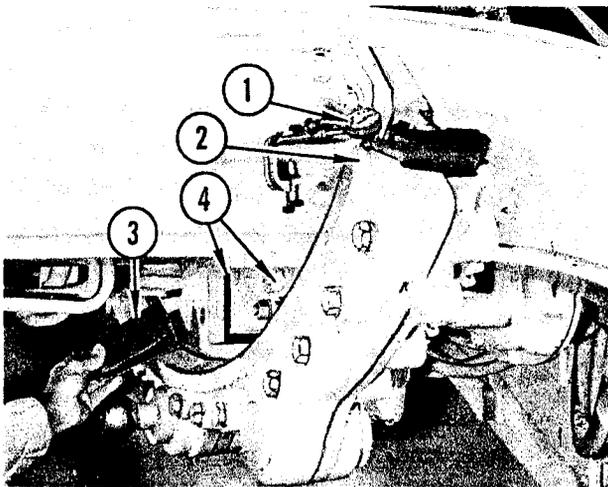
LATERAL SHIFT GEAR ADJUSTMENT
